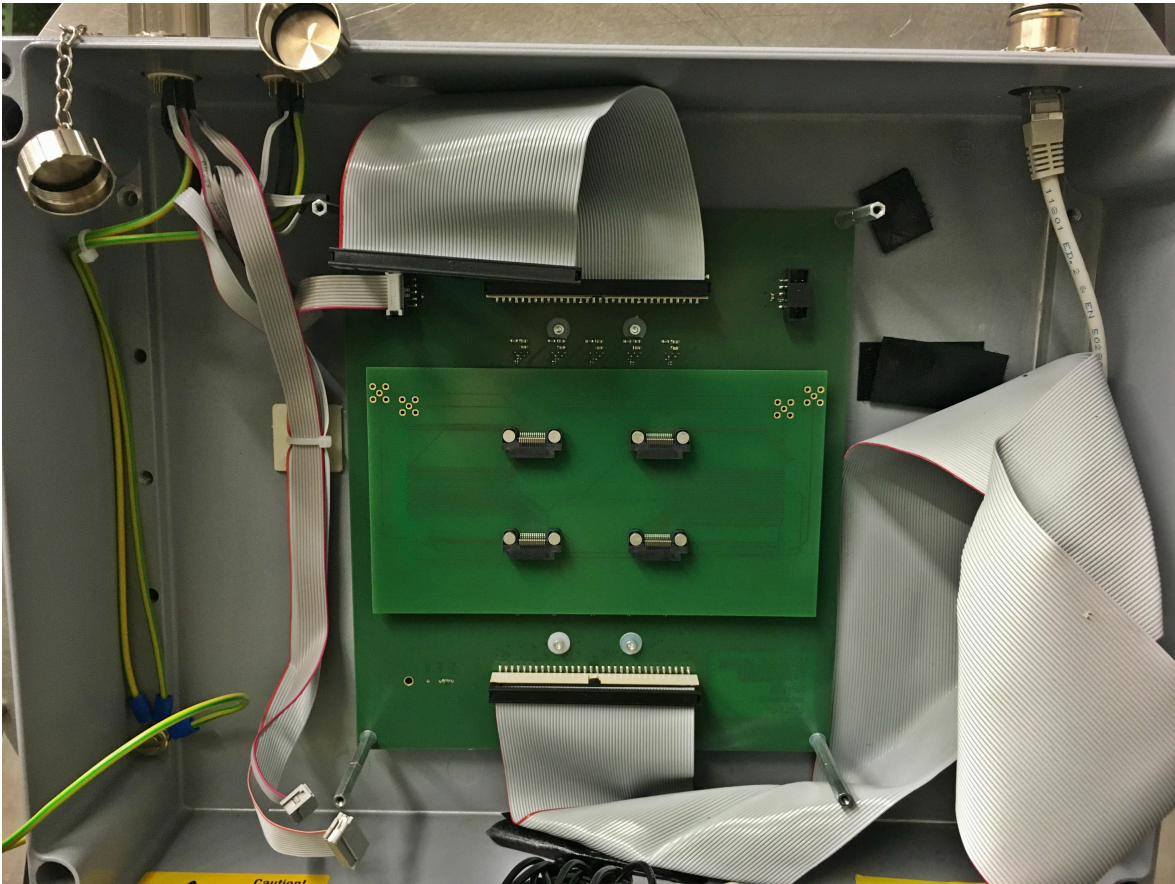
The finished PCB mounted to the back of the FAMOUS telescope.
